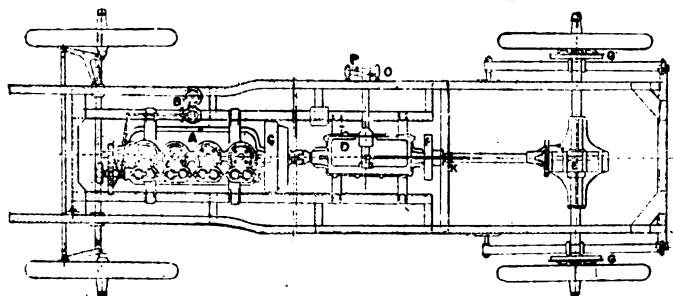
Chassis of Tony Huber 12-h.p. Car.
